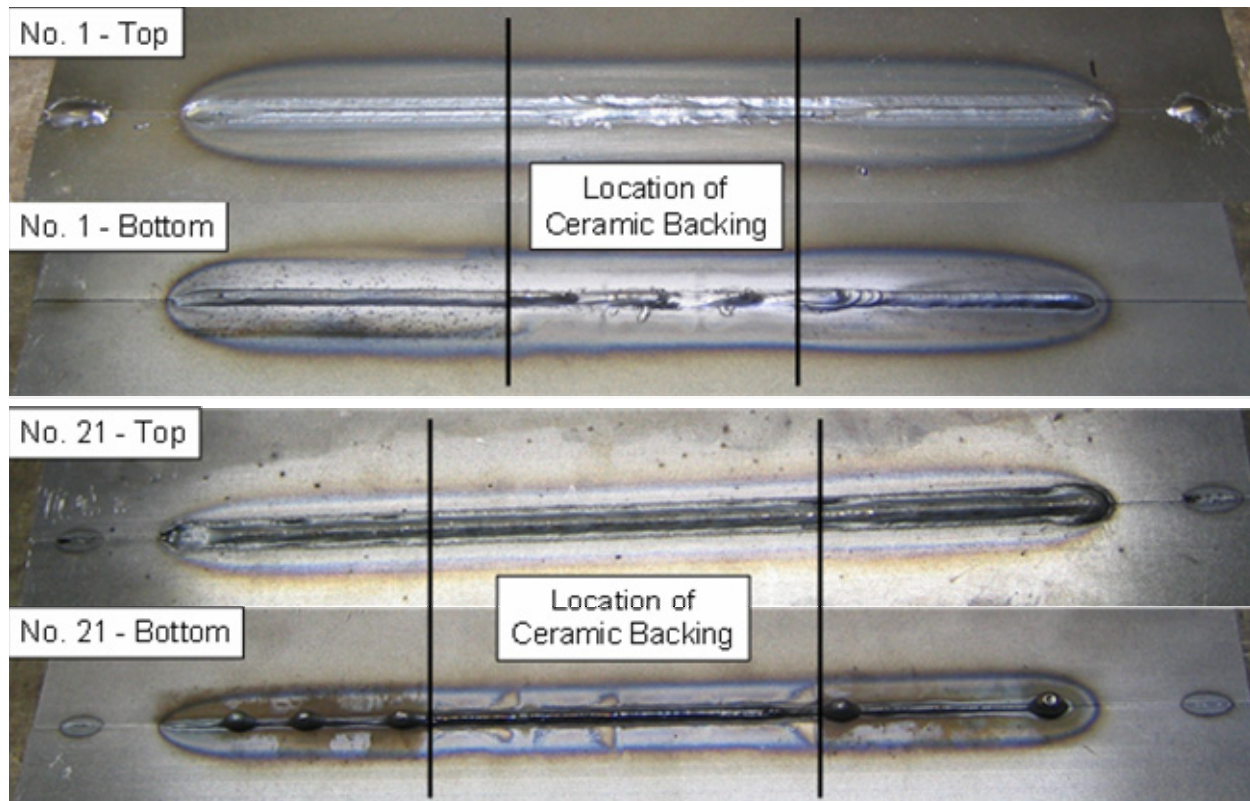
Two welds that employ ceramic backing in the middle third of the weld.
